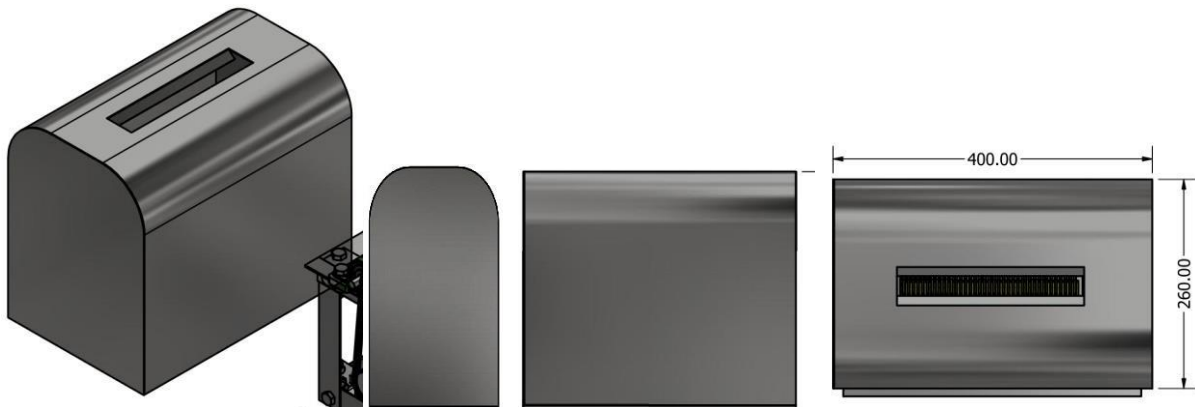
Top Cover (Part Nō 16). Elevation, front and plan views.
